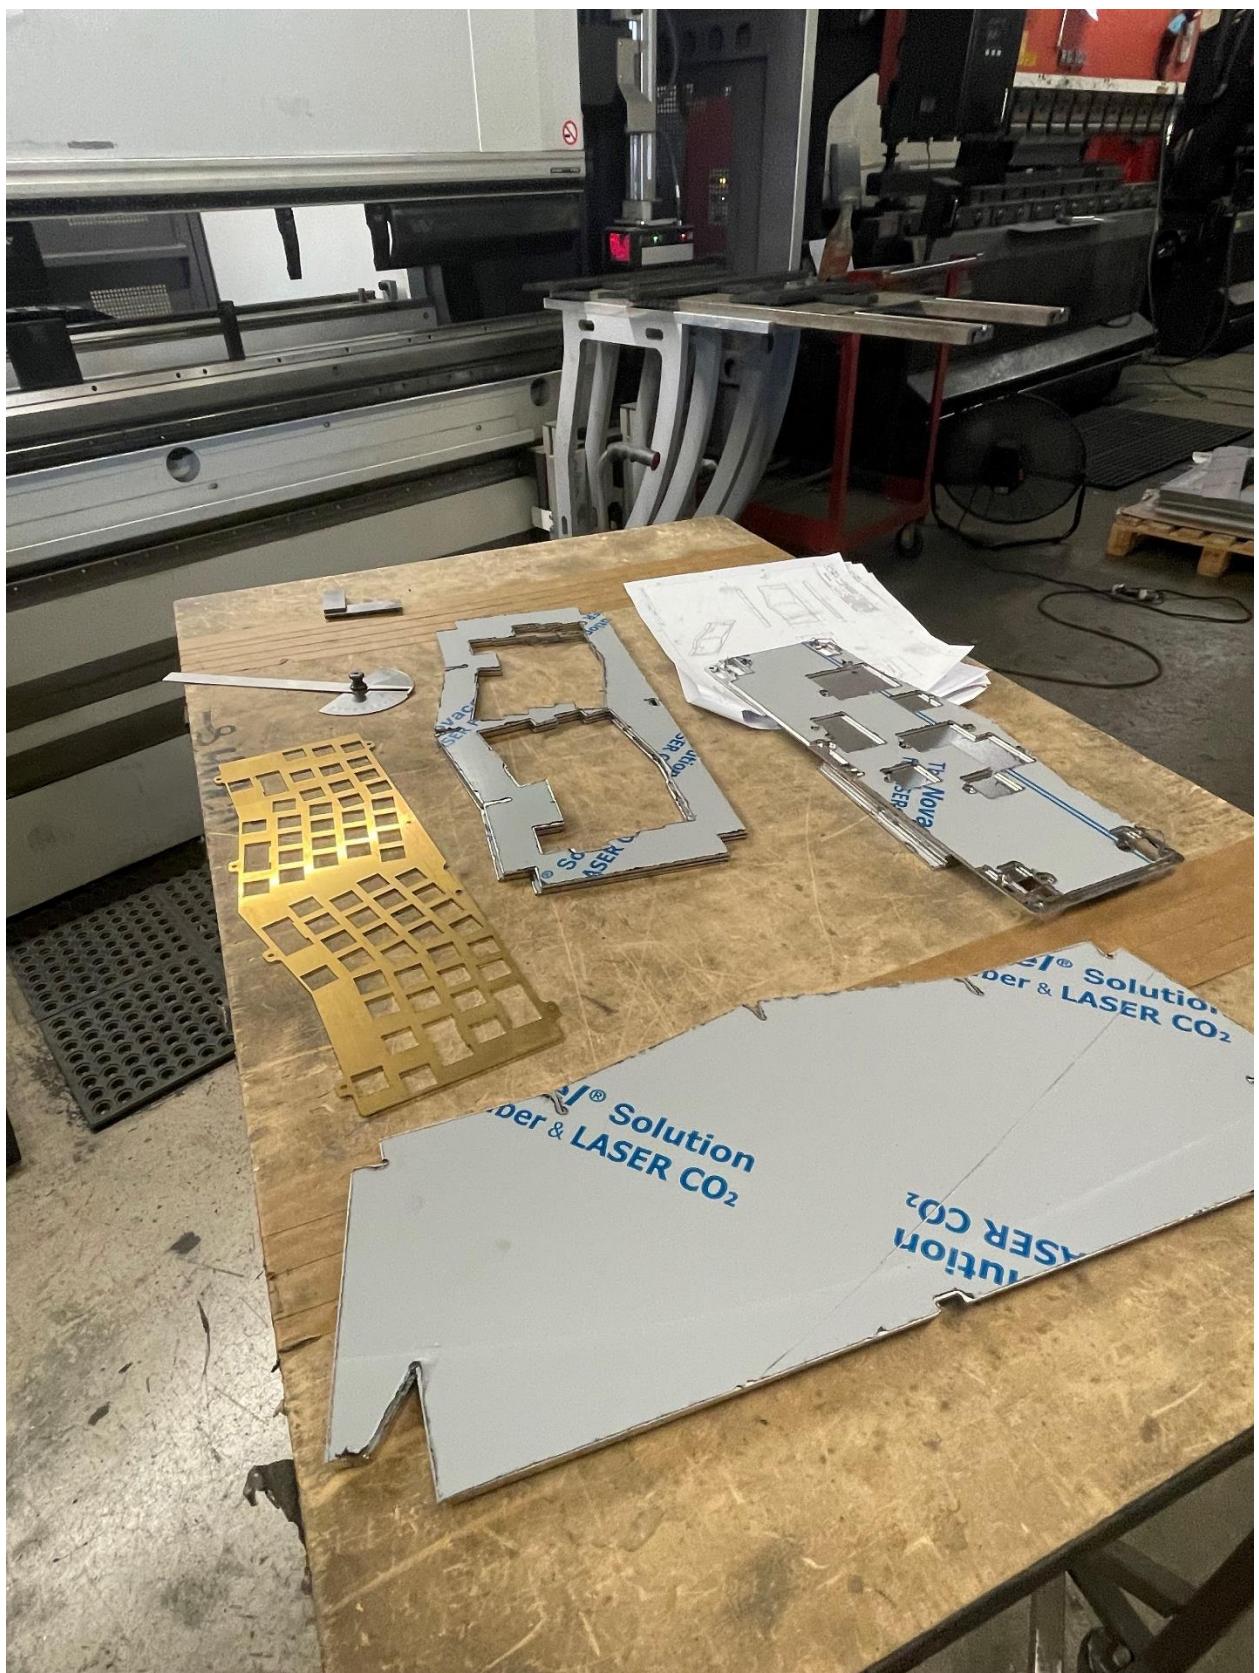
CZ-2000, CZ-2001, and CZ2002 laser cut using machine.
